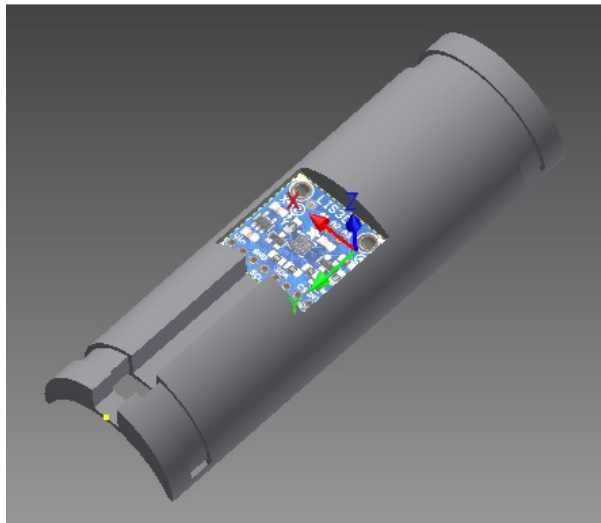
Handle bar grip adaptor mount showing accelerometer location.
